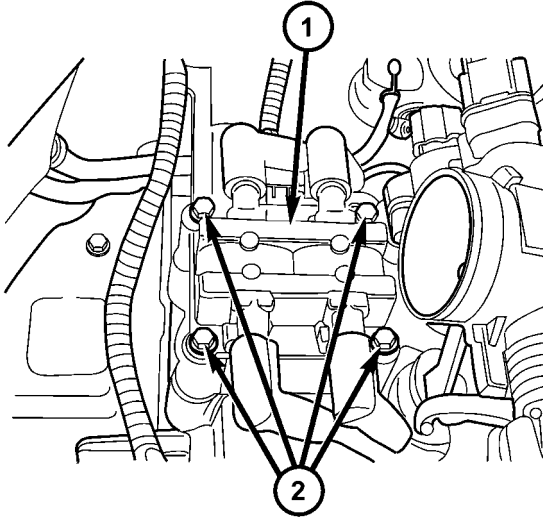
Ignition Coil Rail Location—4.0L 6-Cylinder Engine
